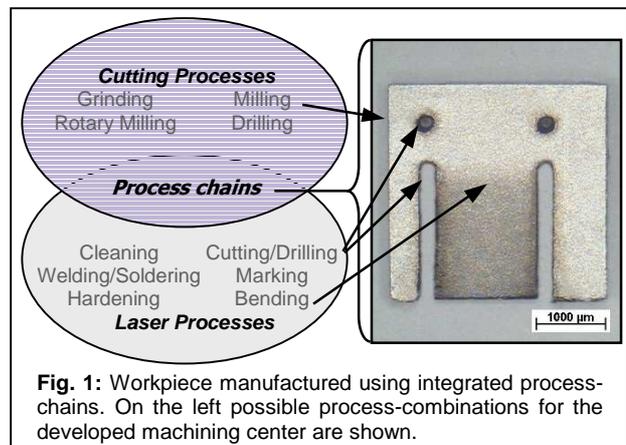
Workpiece manufactured using integrated process-chains. On the left possible process-combinations for the developed machining center are shown.
